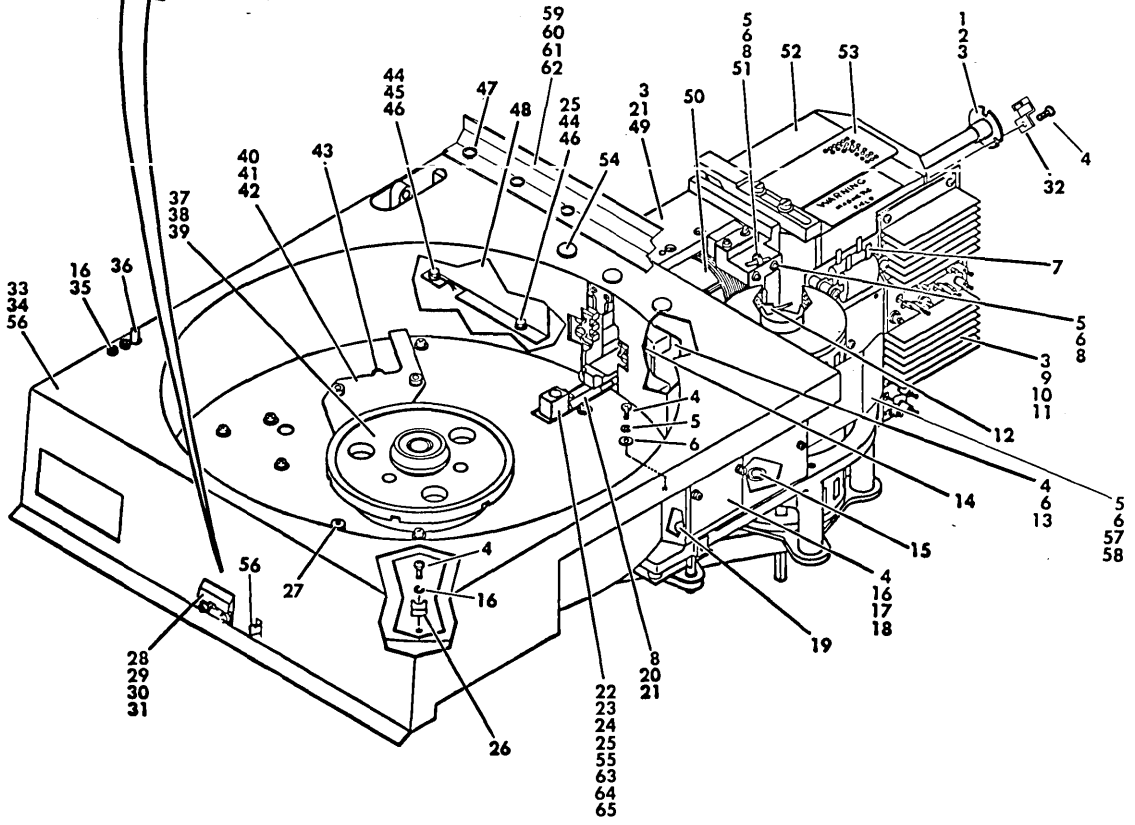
DECK ASSEMBLY (SHEET 1 OF 2)
